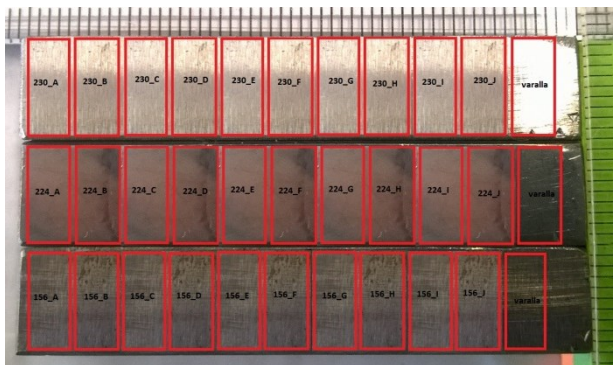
The cutting scheme of Ringhals 4 surrogate weld metal.
